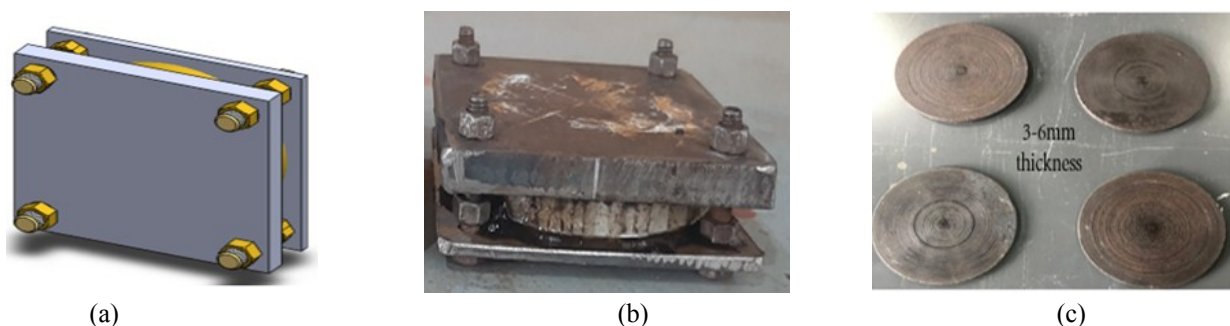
(a) Complete mould, (b) fabricated mould, and (c) moulded composite
